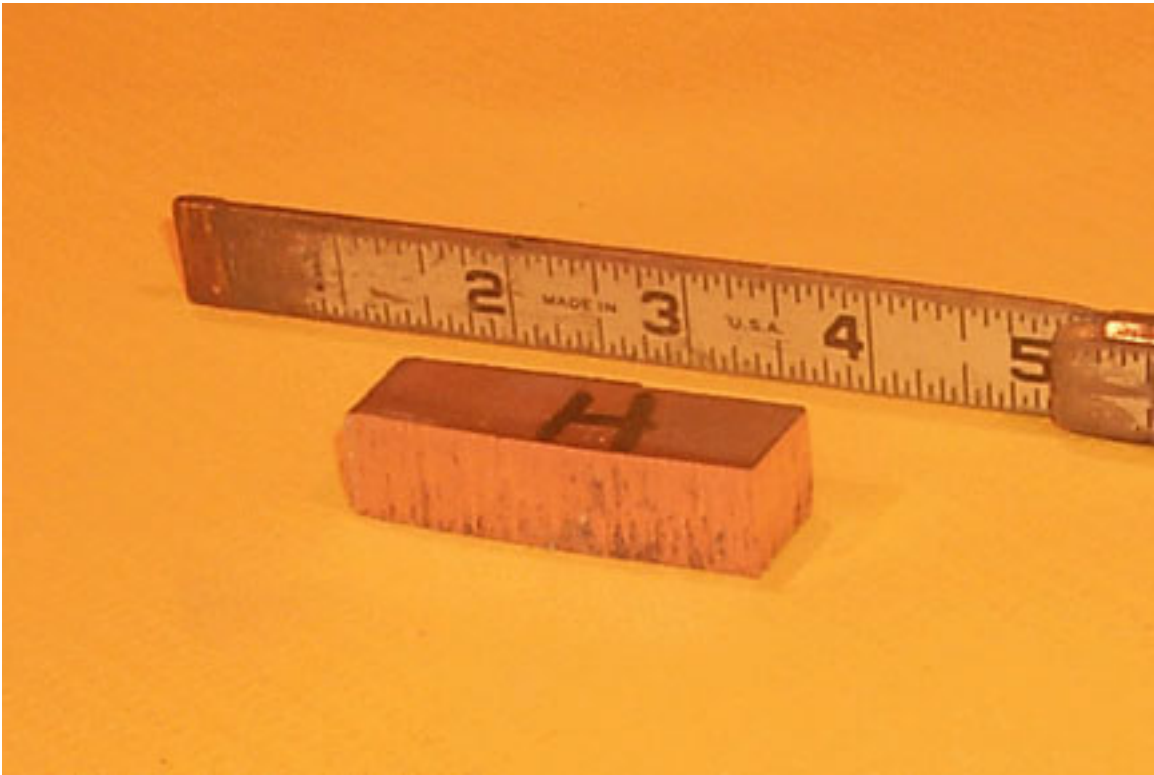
Typical Charpy coupon cut from copper turn prior to machining
